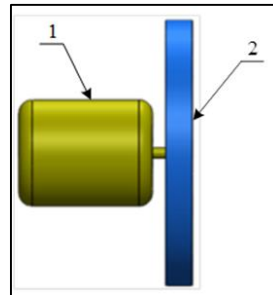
3D model of DC motor and rotating disc in SolidWorks
